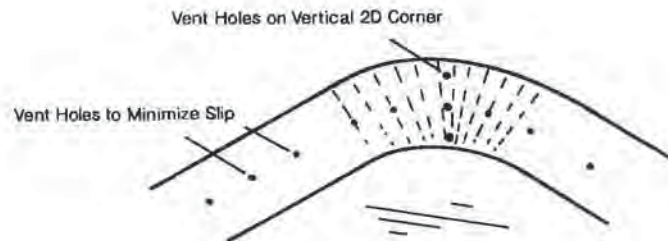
Vent hole location on vertical two-dimensional female mold surfaces
